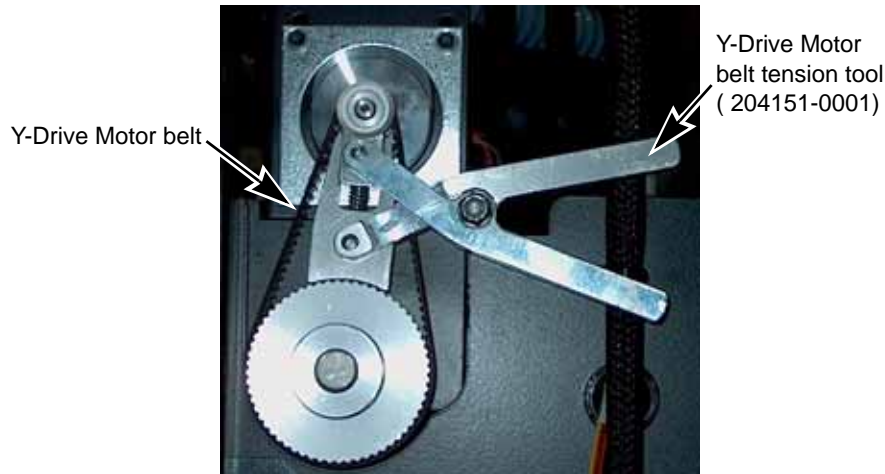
Y-Drive Motor Belt and Tensioning Tool
